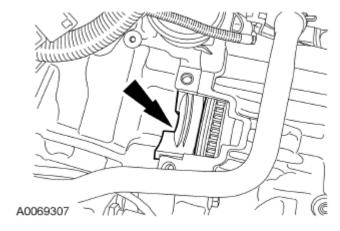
Locating Starter Motor Isolator Courtesy of FORD MOTOR CO.
